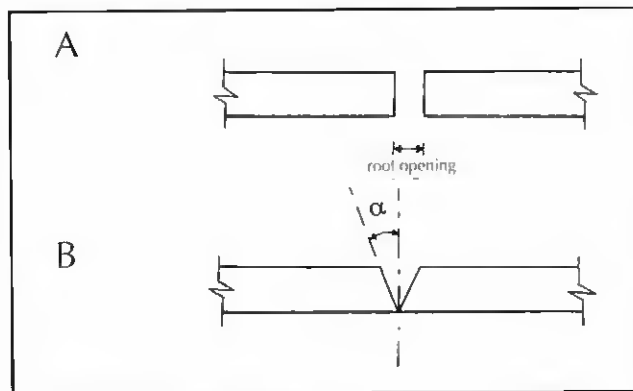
Plate preparation of butt-joint welds: A — square edges; B — beveled edges.
